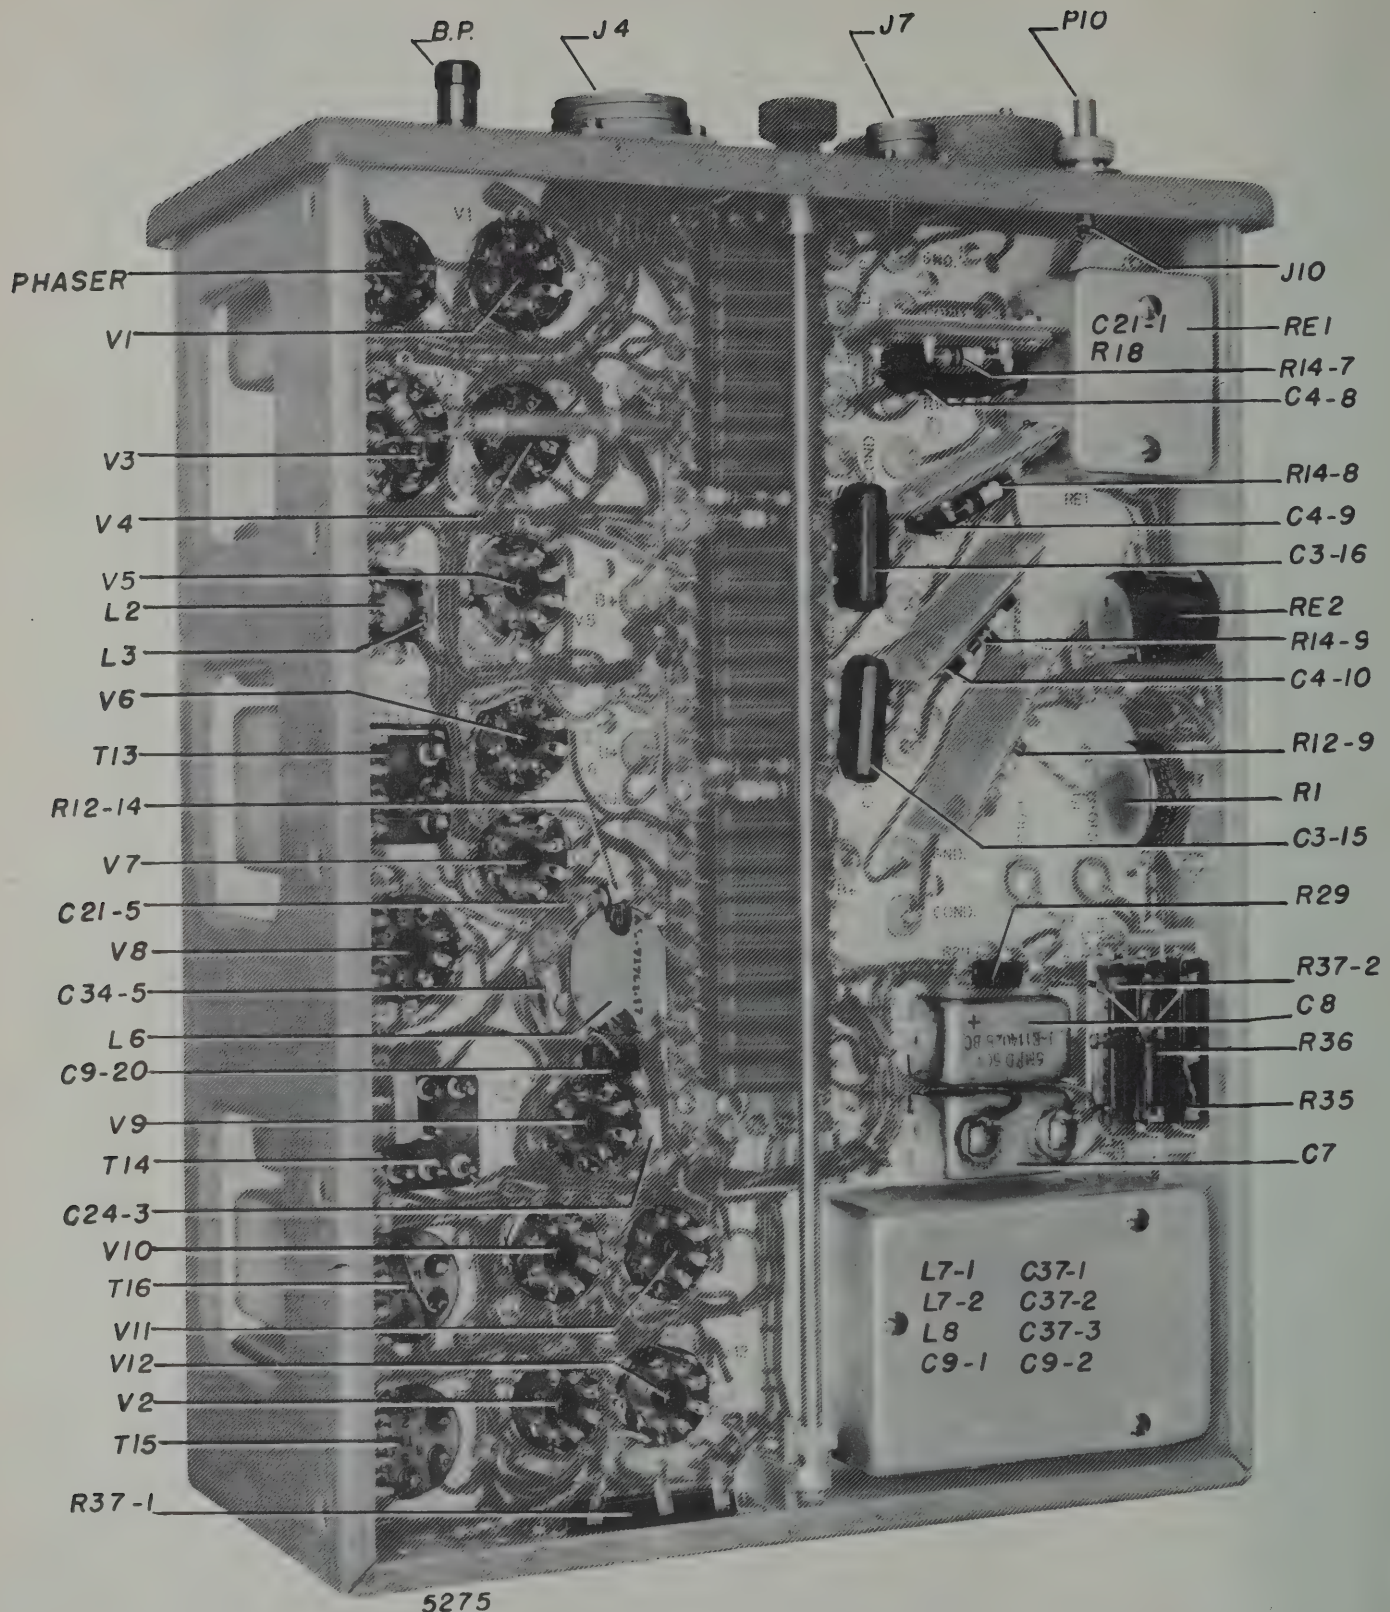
TYPE MN-26 RADIO COMPASS, LEFT BOTTOM VIEW OF CHASSIS
